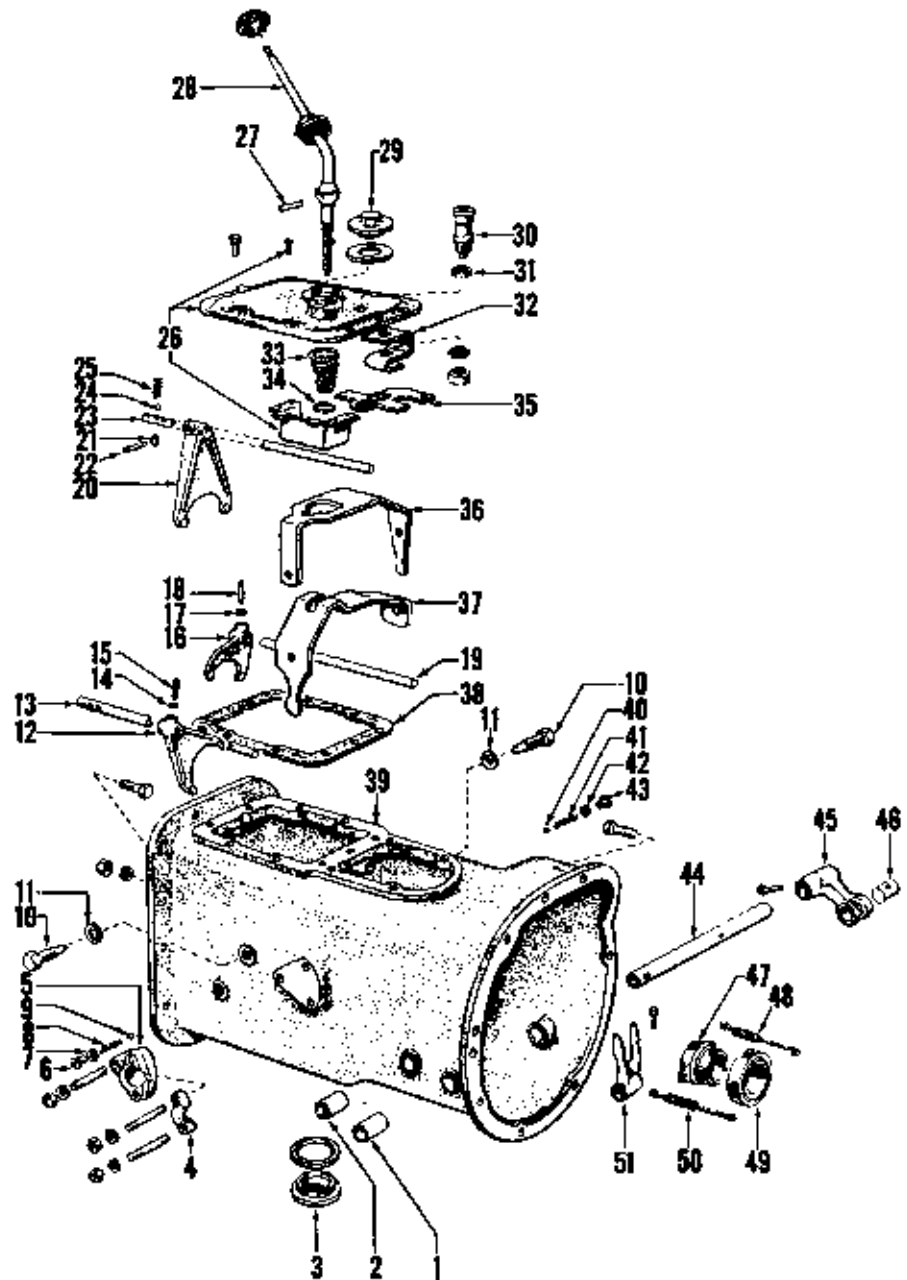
Exploded view of transmission gear shifting mechanism, transmission housing and related parts. Reverse shift fork (16) is different than shown above; refer to Fig. FO52.
